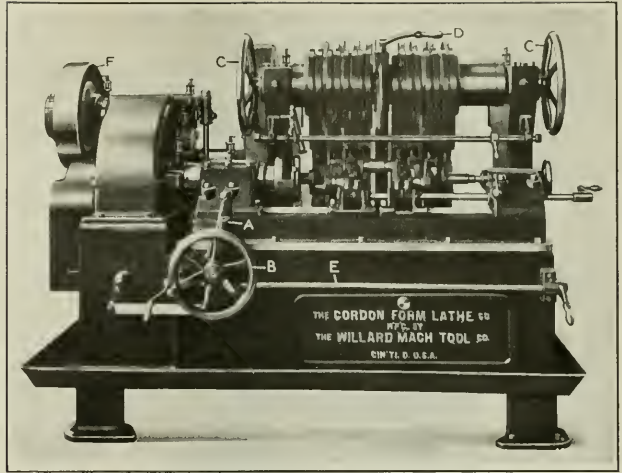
Crankshaft-cheek Turning Lathe developed by the Gordon Form Lathe Co. and built by the Willard Machine Tool Co.
